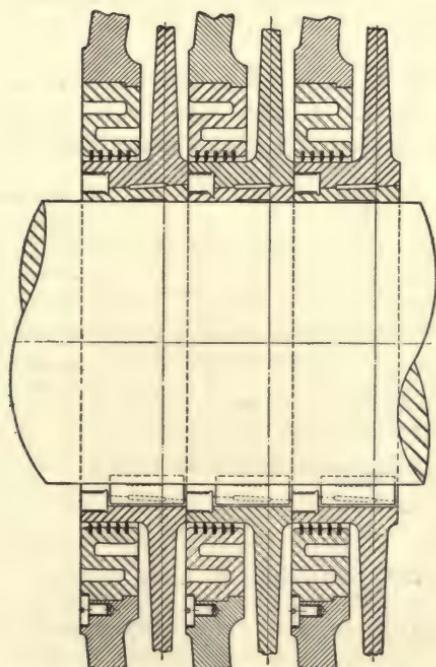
DeLaval multi-stage turbine wheel fastening.
